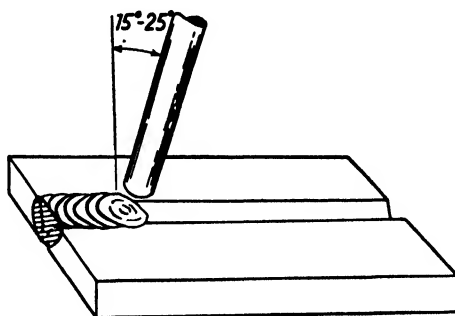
Parts more than about $\frac{1}{8}$ in. in thickness which must be welded from one side should have their edges beveled.
